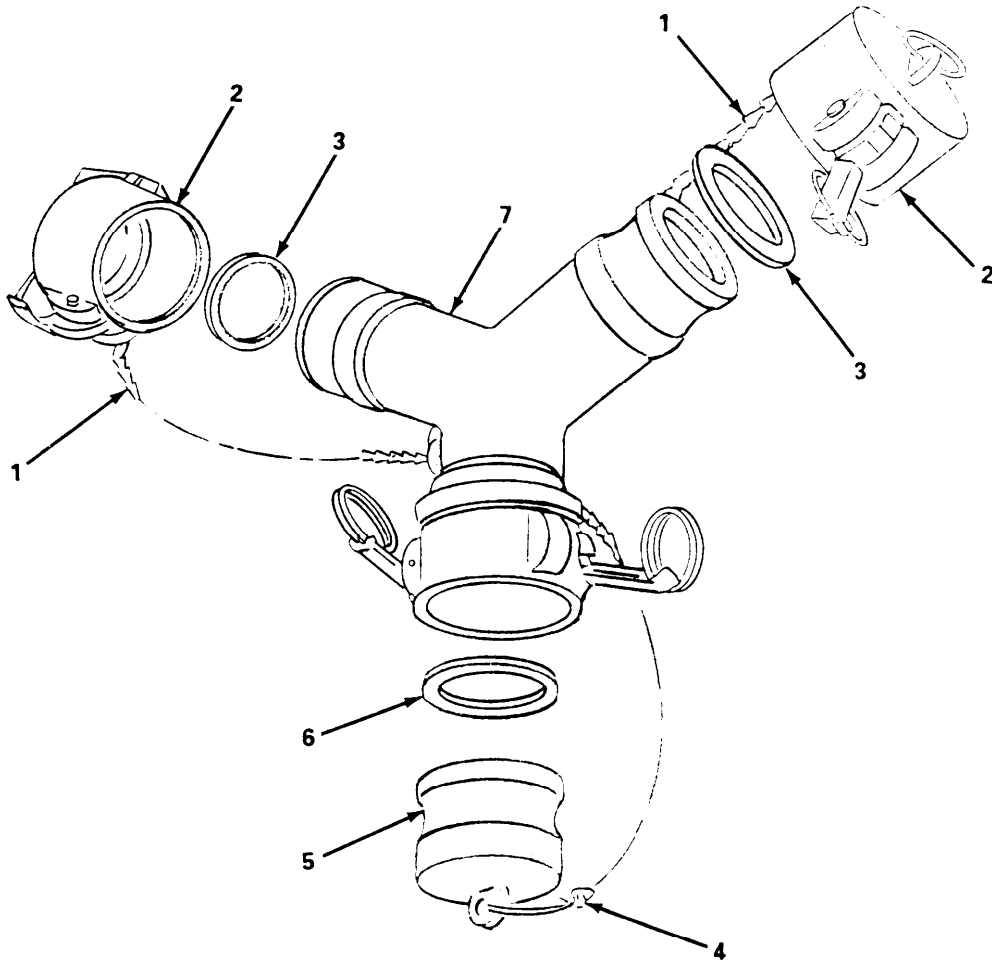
Wye Fitting Assembly, Disassembly/Assembly.
